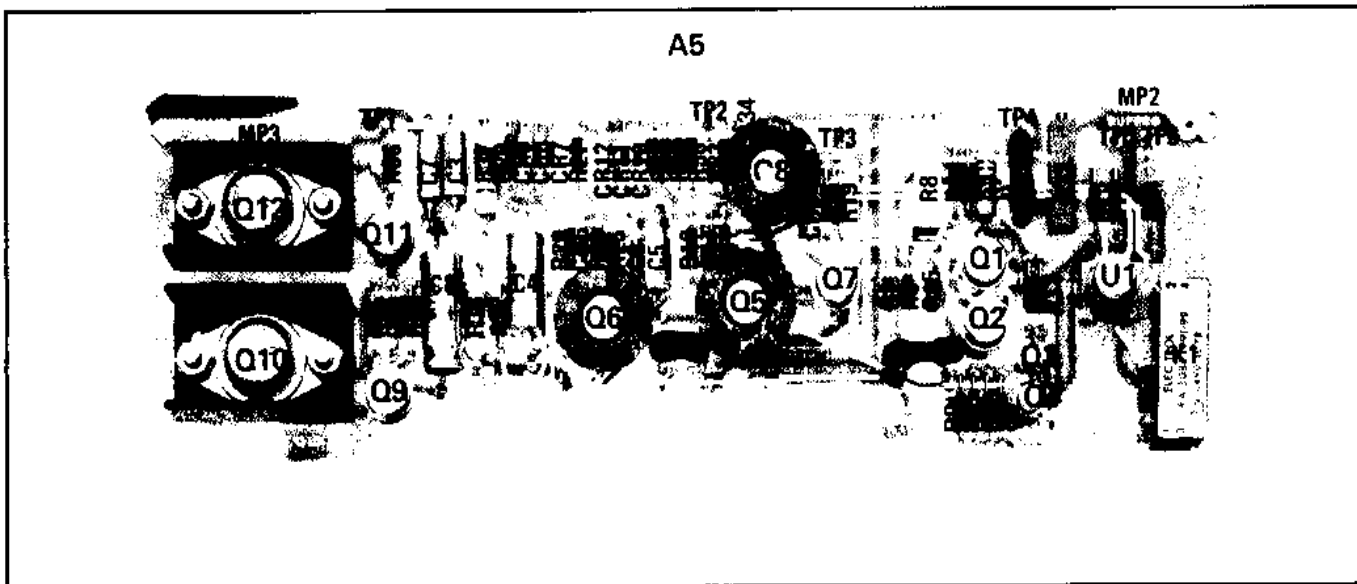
A5 FM Amplifier Assembly Component Locations
